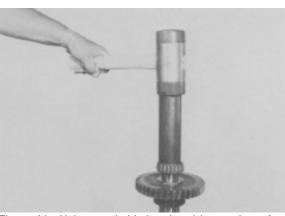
Using a suitable bearing driver and a soft hammer, install mainshaft rear taper bearing. Be certain bearing race is tight against the thrust washer.
